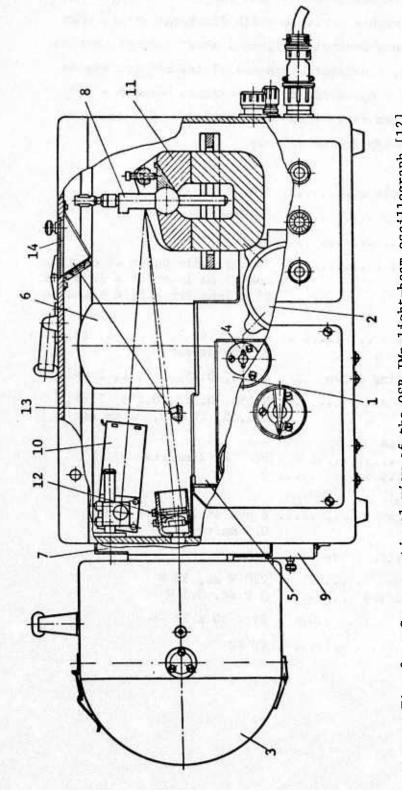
Cross-sectional view of the OSB-IMp light-beam oscillograph [12]
